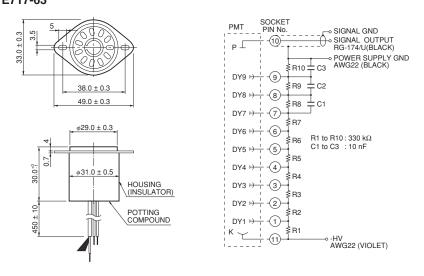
D-type socket assembly (Unit: mm) | Sold separately E717-63
